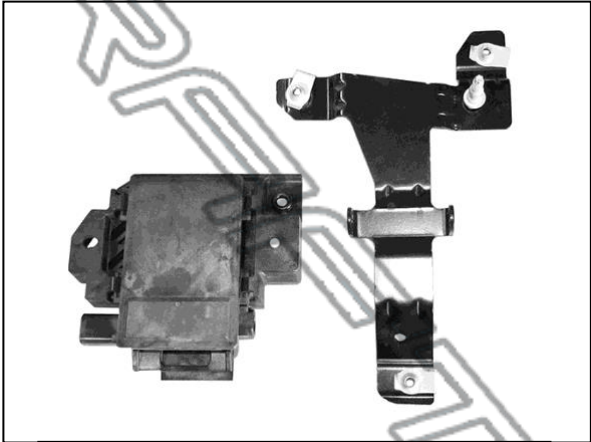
Insert sensor assembly into the sensor mount on back of Bumper
